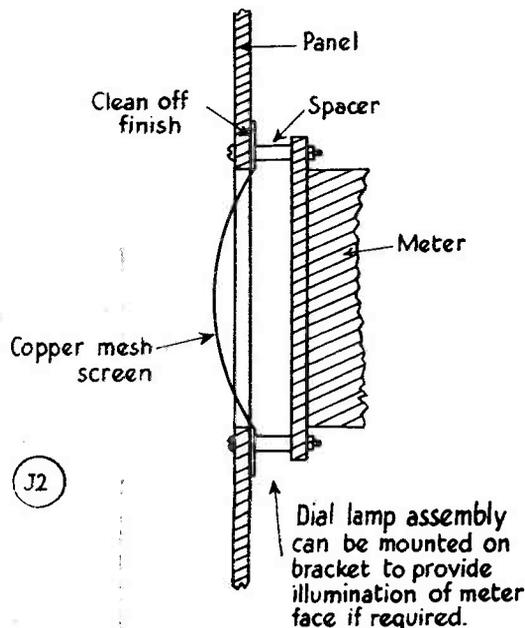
Sub-mounting a meter behind a panel in order to get a good electrical seal.
